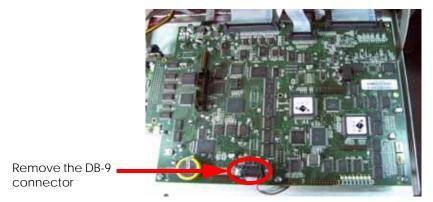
Remove the 2 screws that hold the Diagnostics DB-9 cable in place
